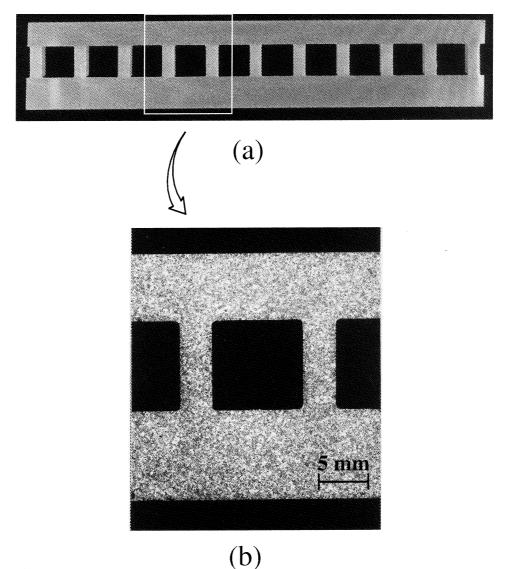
(a) Cross sectional view of the fabricated panel cut along the line A shown in Fig. 1. (b) Its zoomed-up view after chemical etching.
